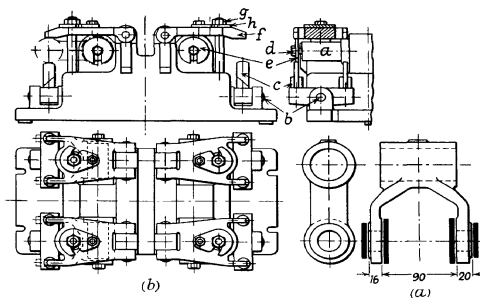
(a) WORK PIECE. STEEL CASTING. (b) REVOLVING MILLING JIG FOR 4 PIECES, 4 SURFACES MILLED SIMULTANEOUSLY. OUTPUT 130 PIECES PER HOUR.
